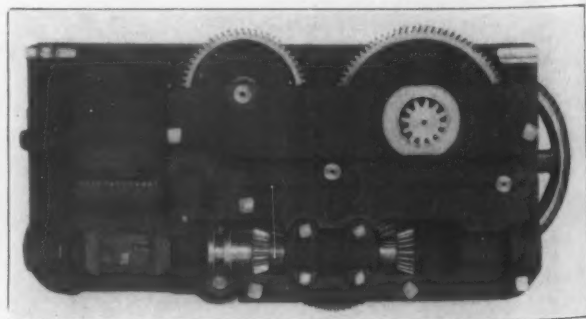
Rear View of the Double Plate Box Type Apron.
